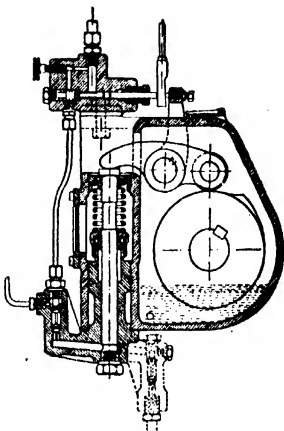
Oil Pump and Governing Gear of Crossley Engine
